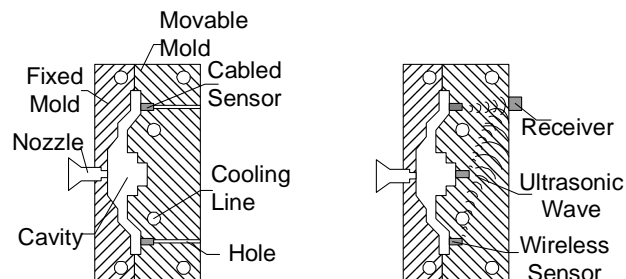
Existing cabled cavity pressure sensor (left) and remote cavity pressure sensor (right)
